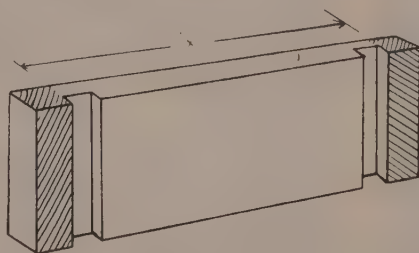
METHOD OF HOUSING (ILLUSTRATION SHOWS DRAWER FRONT).
